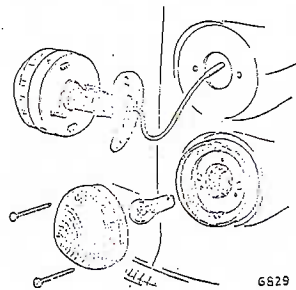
Exploded view of stop/tail and rear flasher lamps
